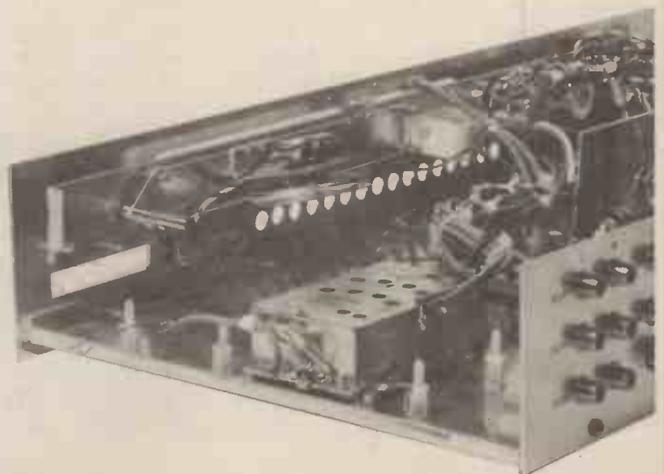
Alternative method of assembly using angle strip to avoid any bending of chassis base plate.
